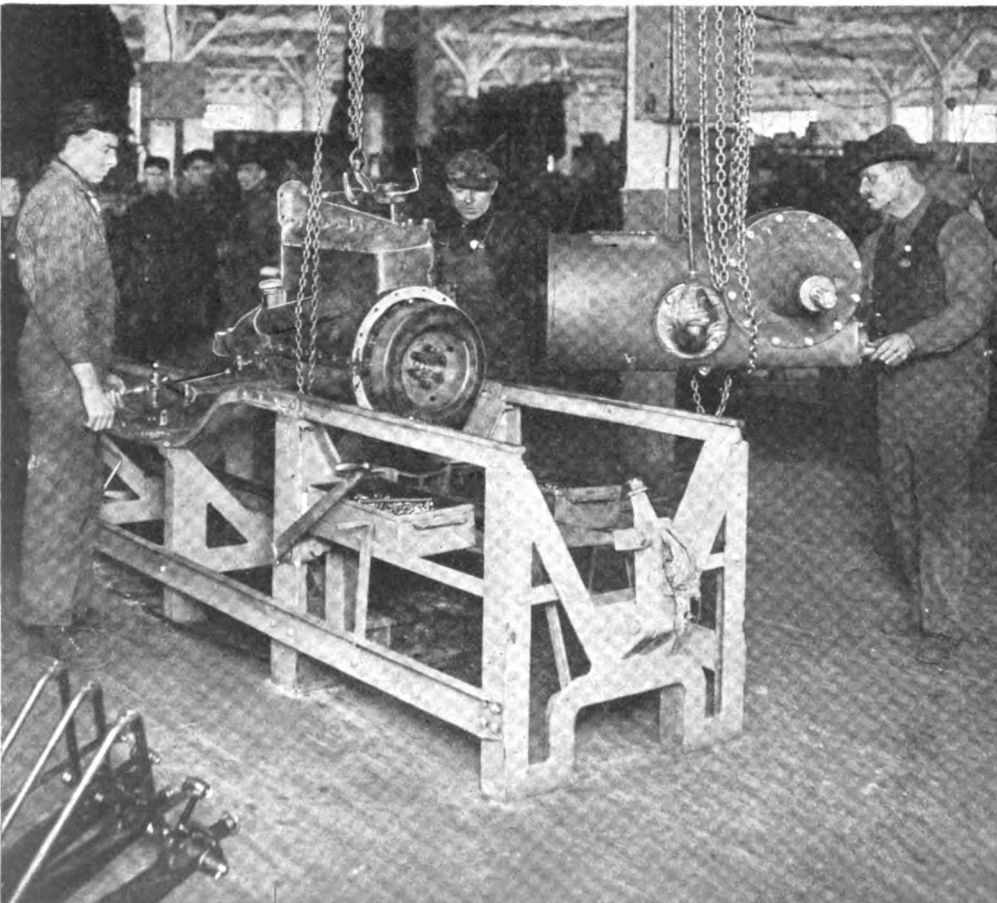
When the completed transmission housing assembly reaches the end of the chain it is swung over to the beginning of the tractor assembly track. This starts out with a stationary stand upon which the halves are first bolted together before they are pushed down an incline and enter upon the moving track
